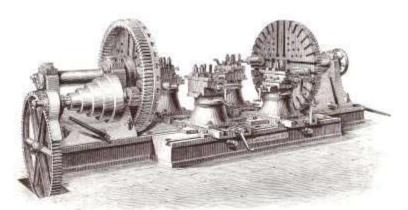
Lathe for turning locomotive wheels in mid-19th C.
